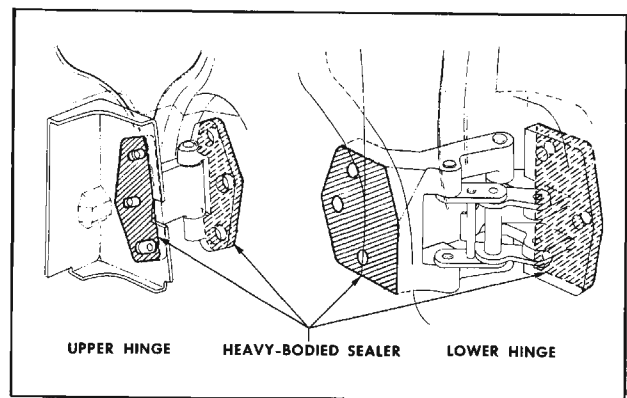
Rear Door Hinge Anti-Squeak Sealing
